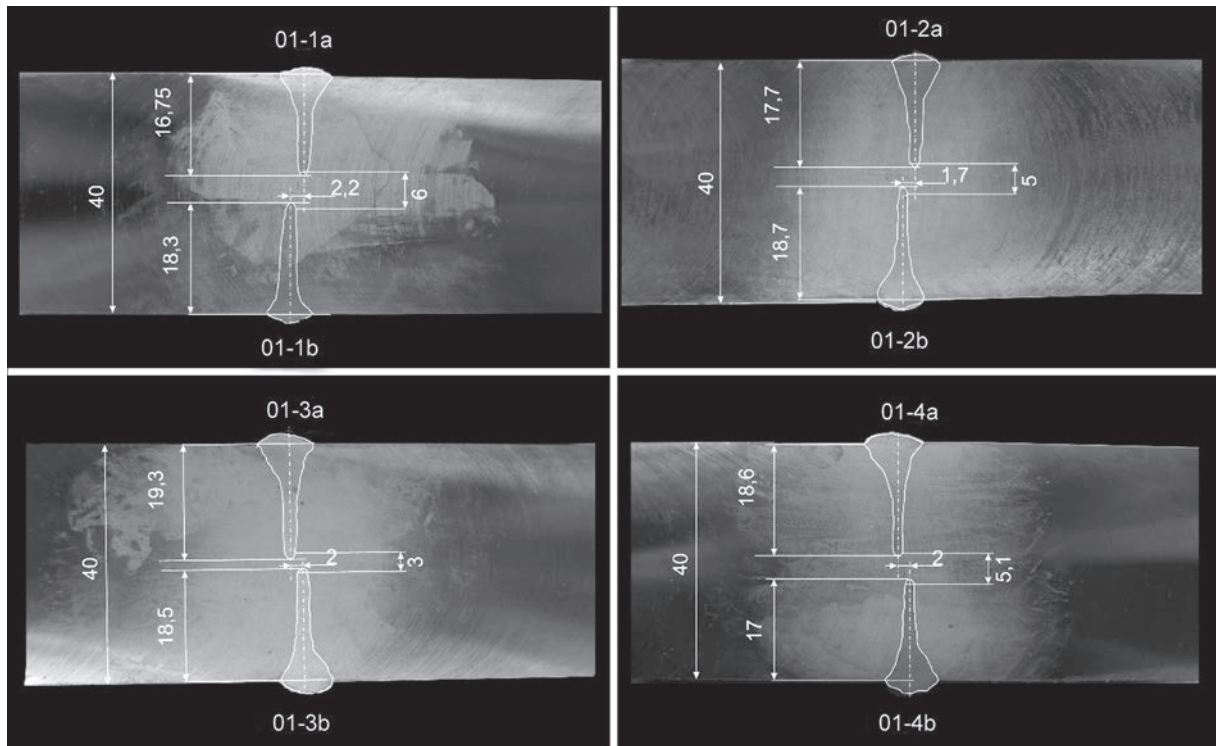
Average values of penetration depth of butt joints of specimens of 40 mm thickness, produced at different gap value  $g$  (double-sided welding, first weld — A, second — B)
